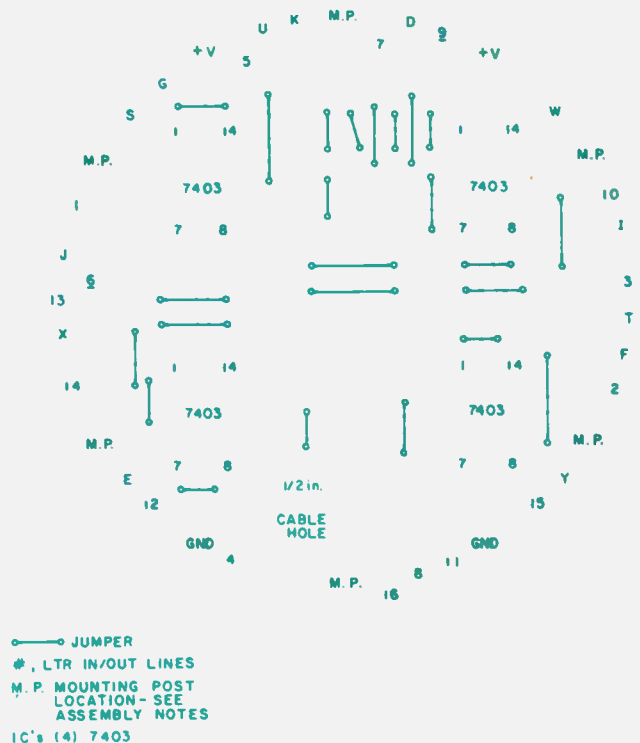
Component side of decoder board B. Numbers and letters indicate proper placement of input/output leads to other boards. Solid lines connecting dots are jumper leads on component side.
